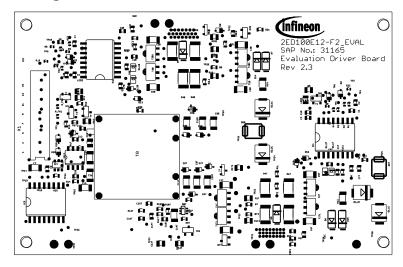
Assembly drawing of the EconoDUAL<sup>™</sup> 3 driver board
